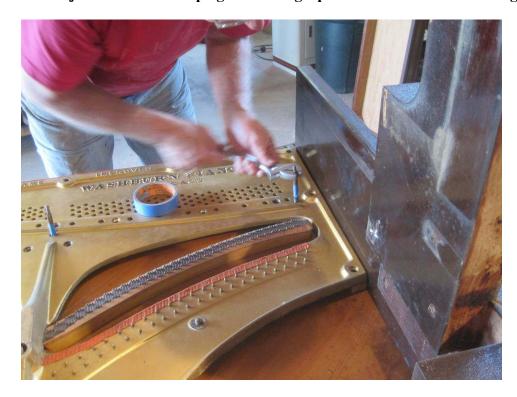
Dave removes all bolts and nuts holding the plate to the piano.
